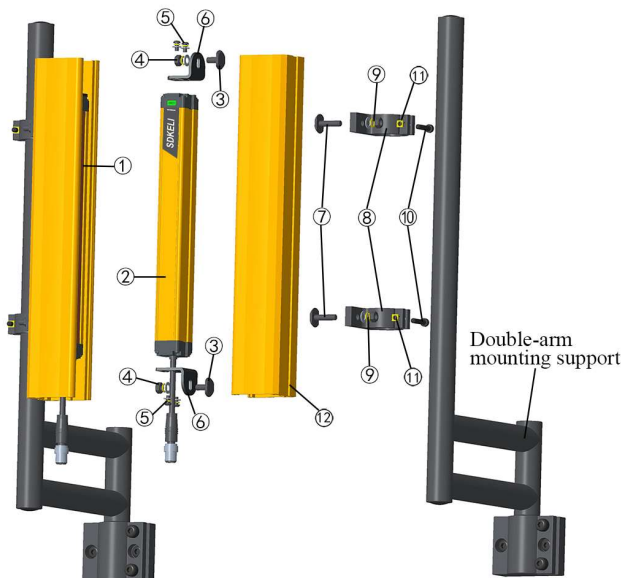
Scatter shield double-arm mounting (SF)
